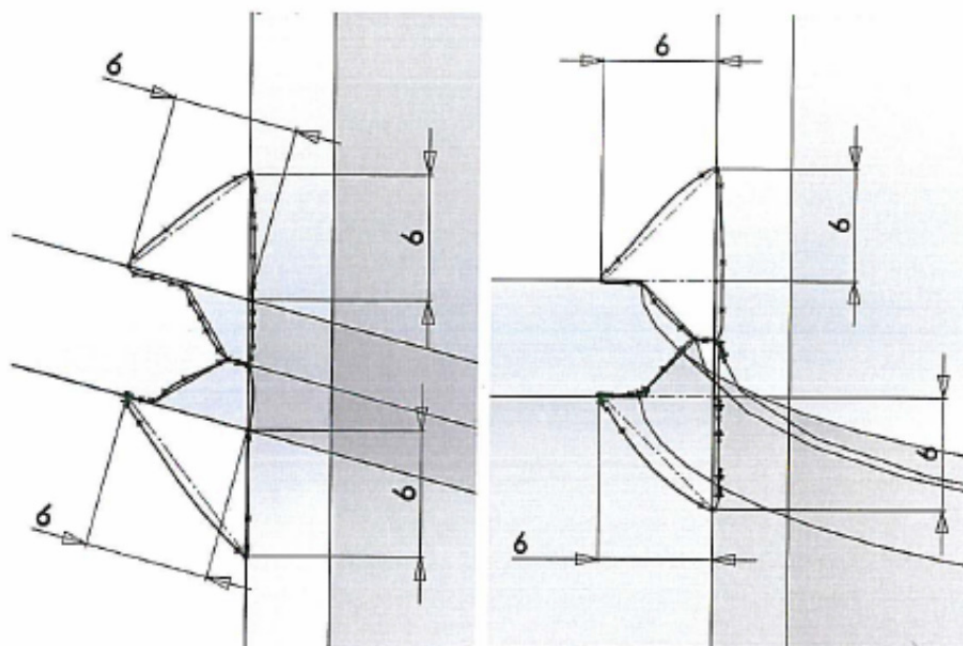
Equal 6mm fillet welds superimposed on complete penetration bevel welds.
